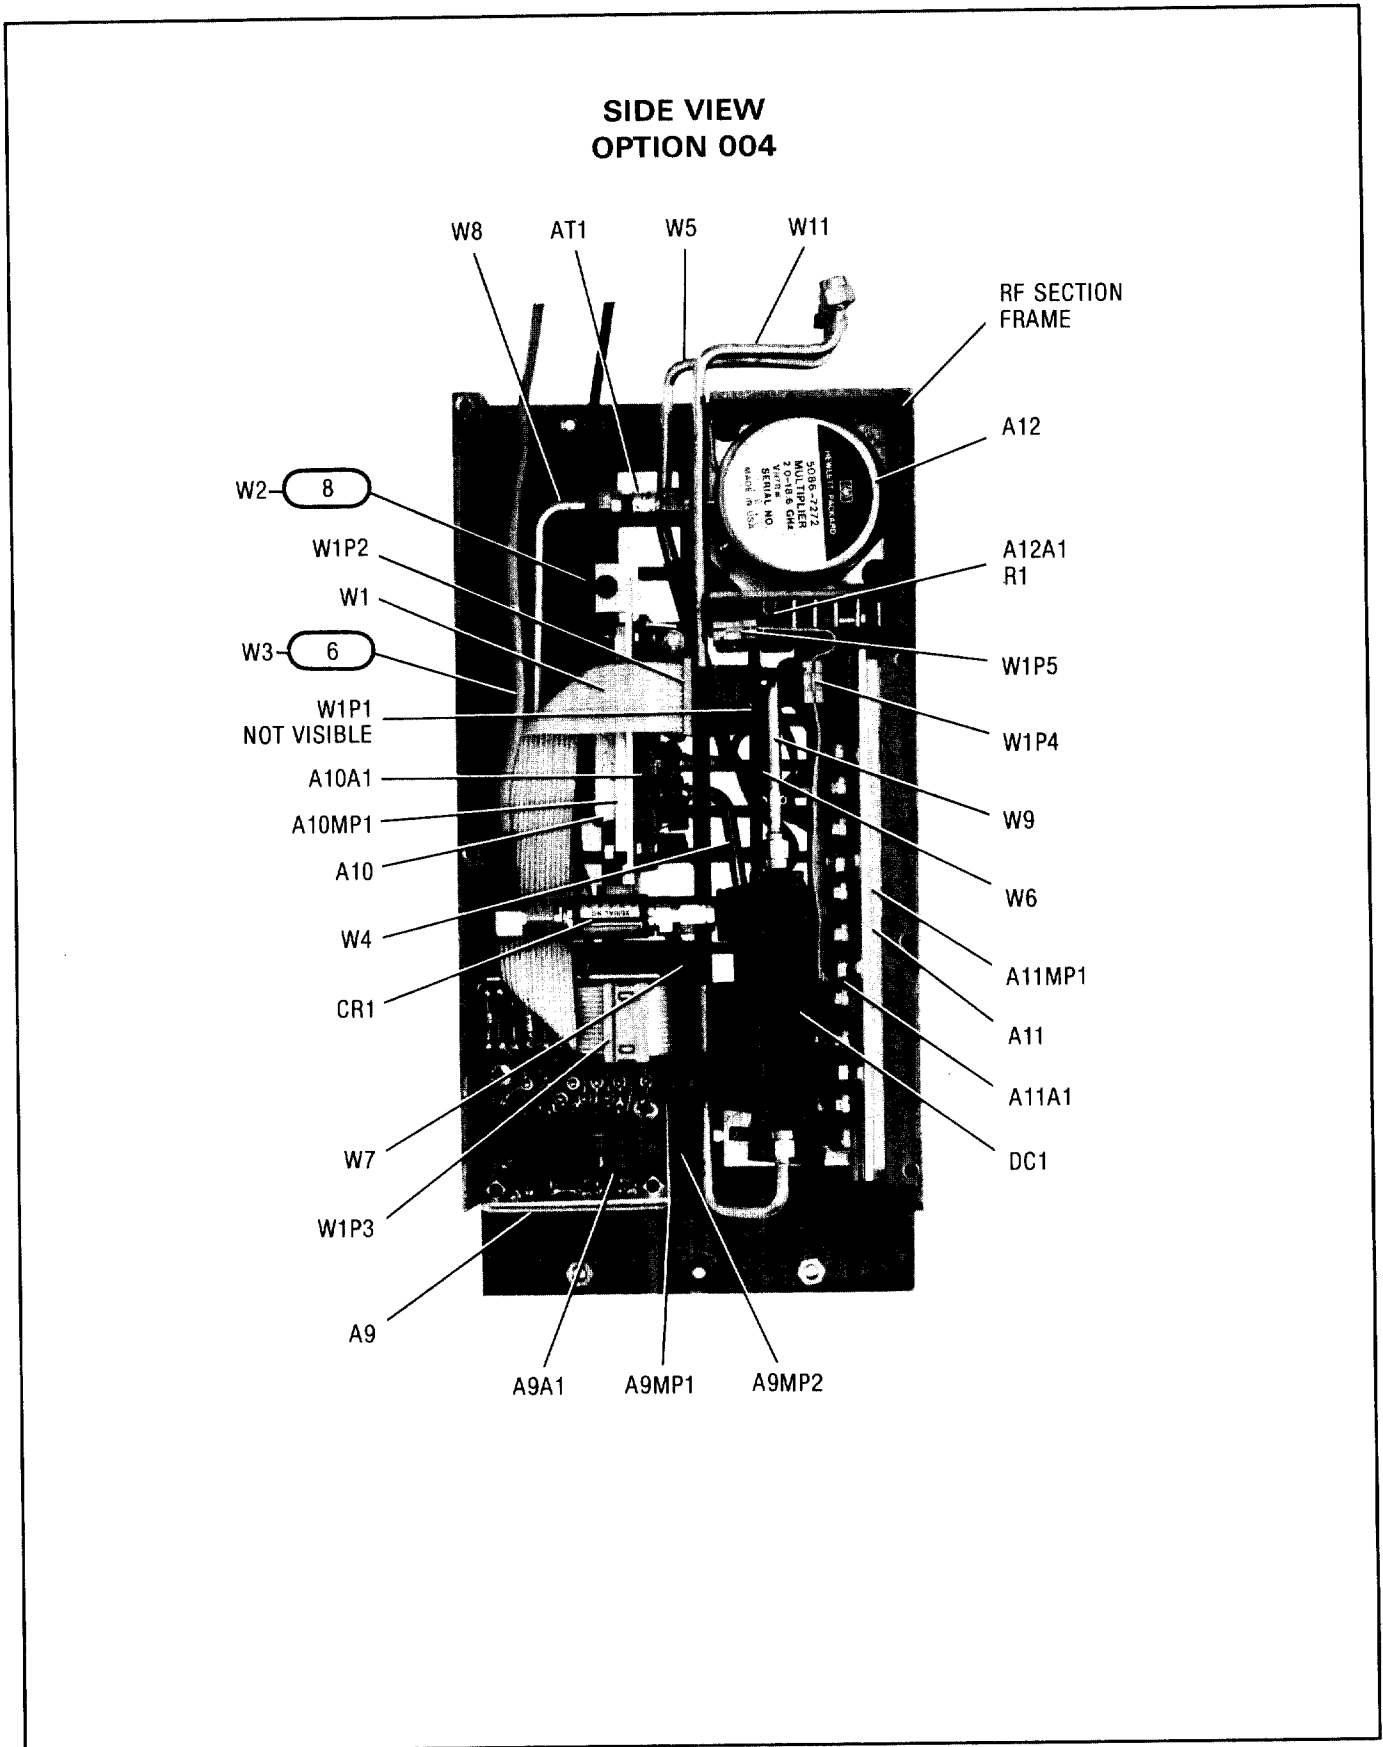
RF Section, Major Assembly and Component Locations (2 of 2), Option 004
